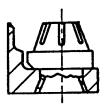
FLANGE ASSEMBLY, FLARED SHANK NUT
